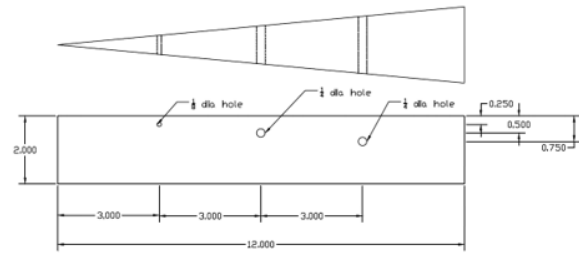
Top-view crossing diamond wedge sample with through-drilled holes
